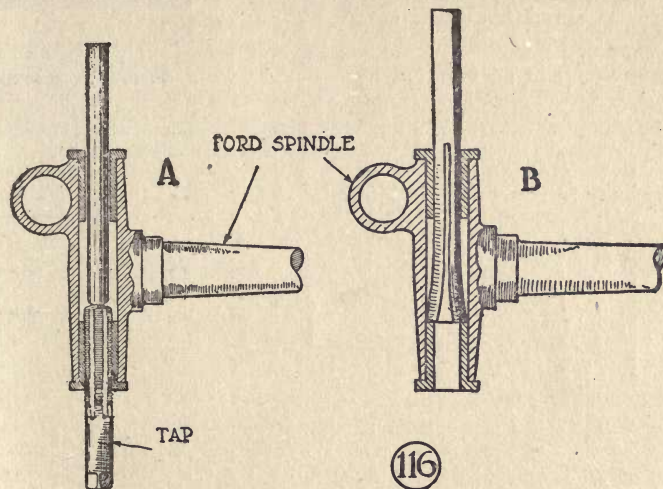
Two methods of removing spindle body bushings. A shows a tap started in one of the bushings so that an old spindle bolt can be driven against the bottom of the tap, both tap and bushing being driven out. B is a split pin which is compressed to get it in the top bushing, the legs then spreading out so that they will push the other bushing out
